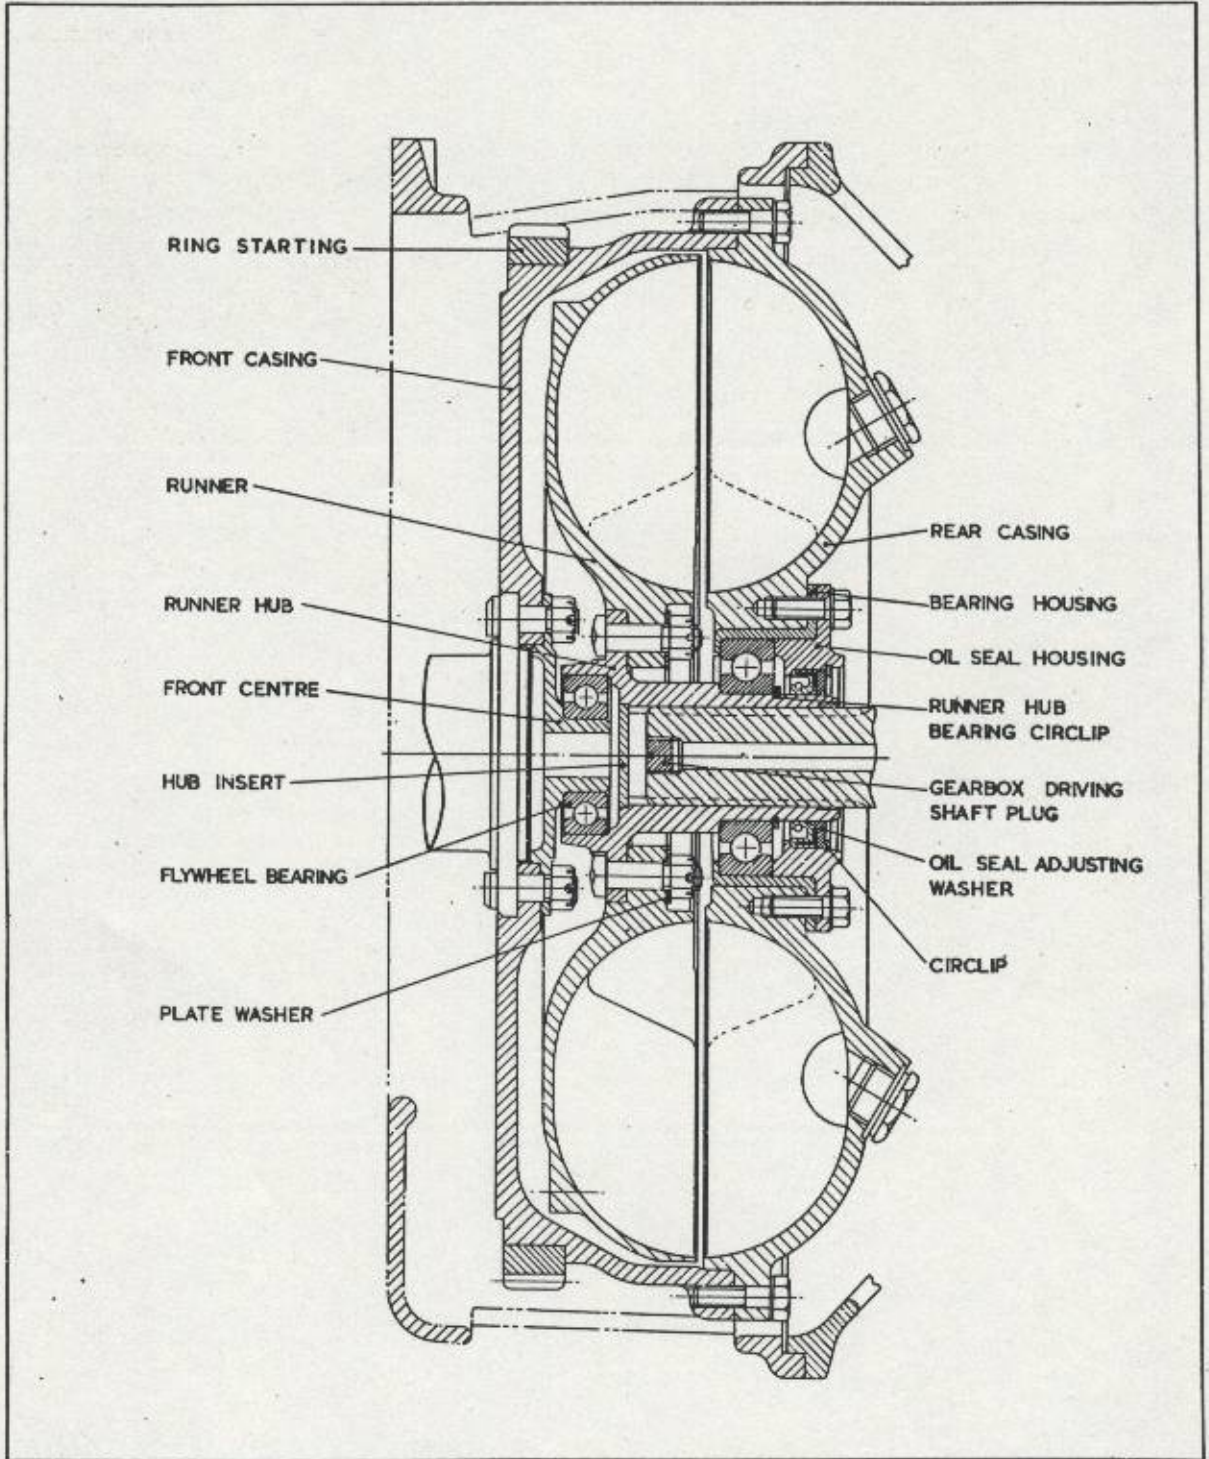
FLUID FLYWHEEL - GENERAL ARRANGEMENT
